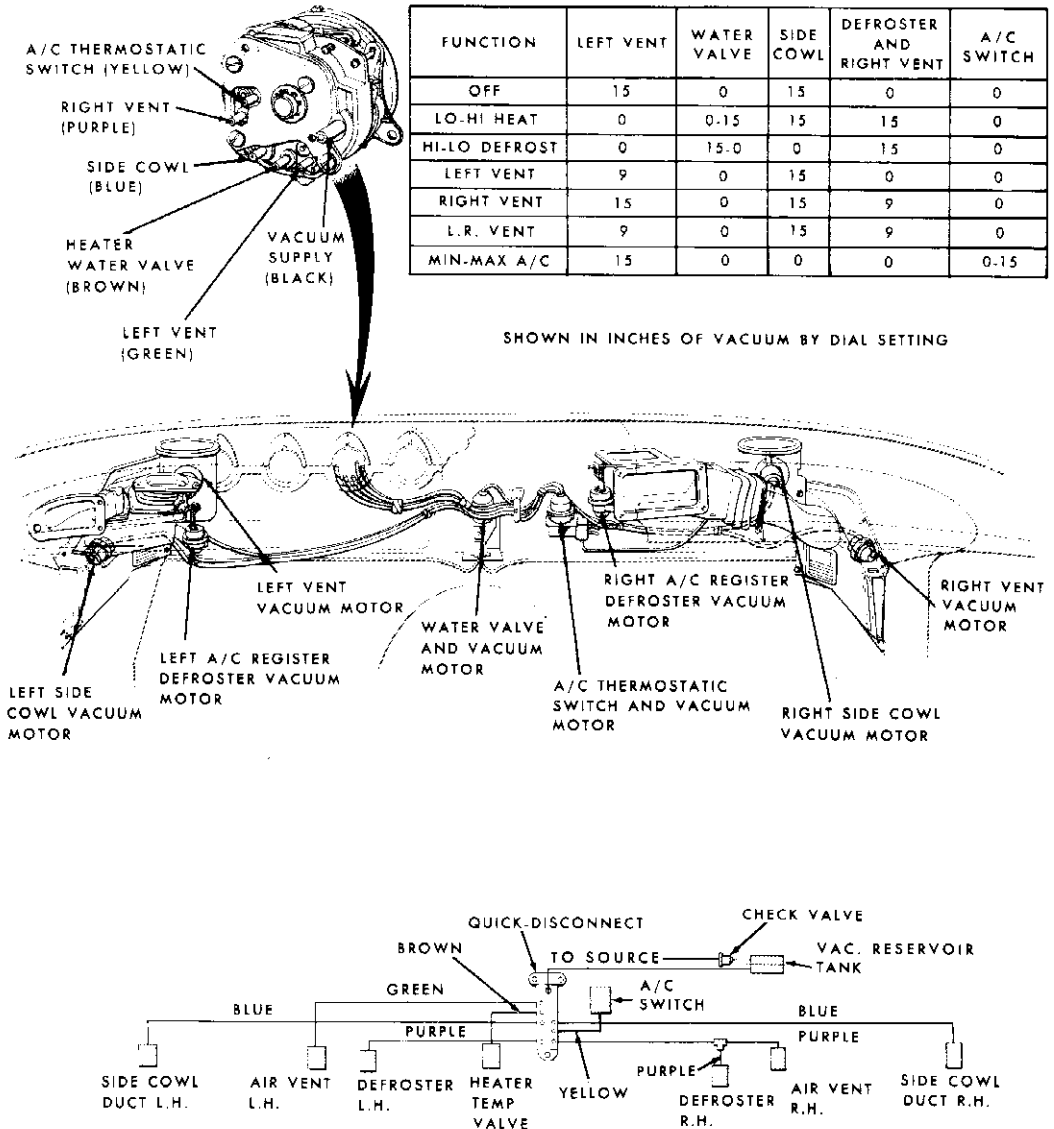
Heater and Air Conditioning Vacuum Control System—1960—(60L-8823)
